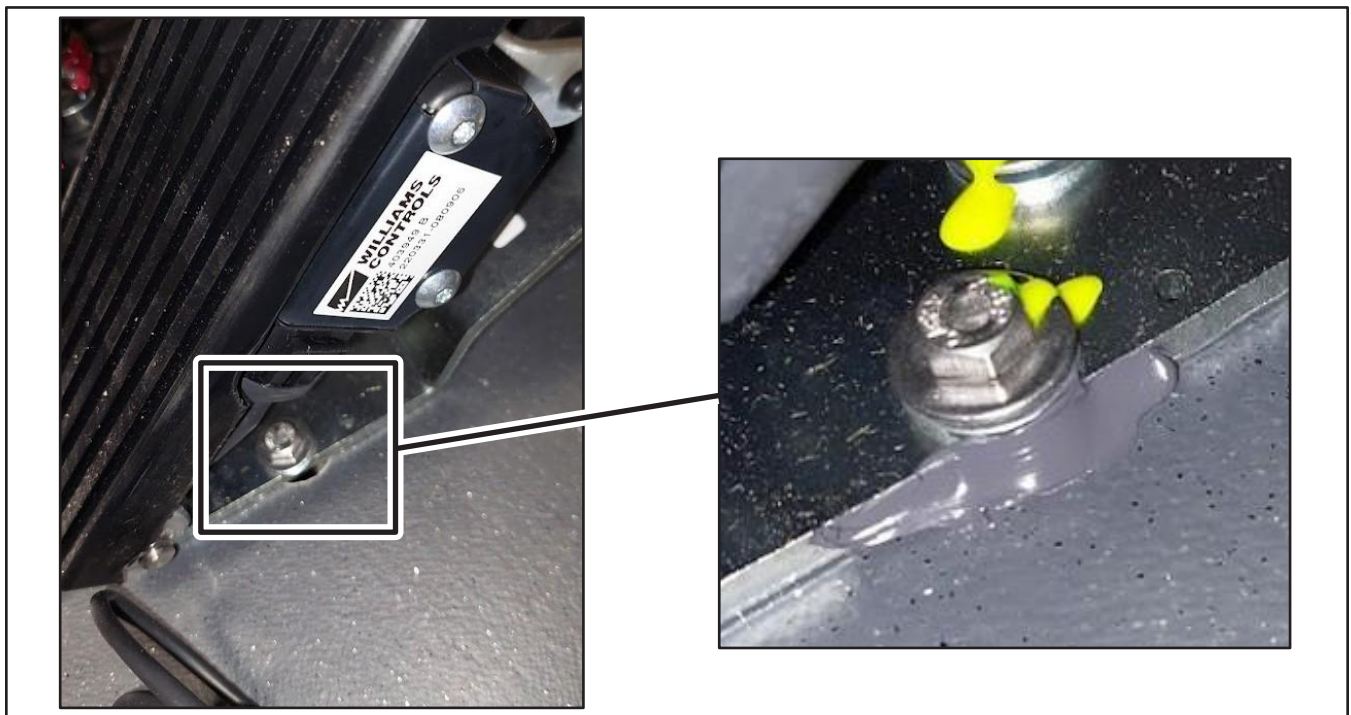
Seal any Floor Opening and Around Pedals (Typical)
